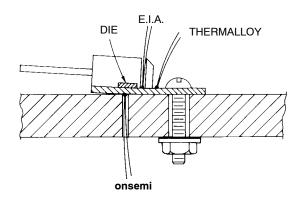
JEDEC TO-220 Package Mounted to Heatsink Showing Various Thermocouple Locations and Lifting Caused by Pressure at One End
